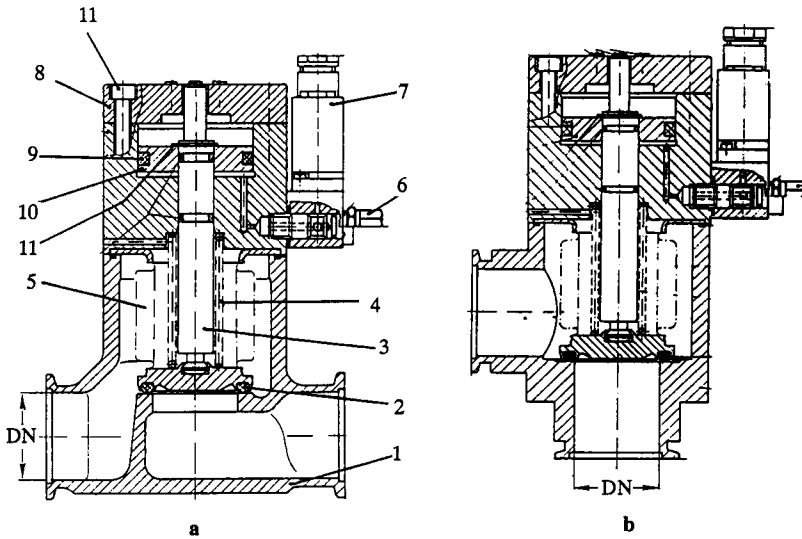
Bellows-sealed standard valves. (a) Right-angle valve.
